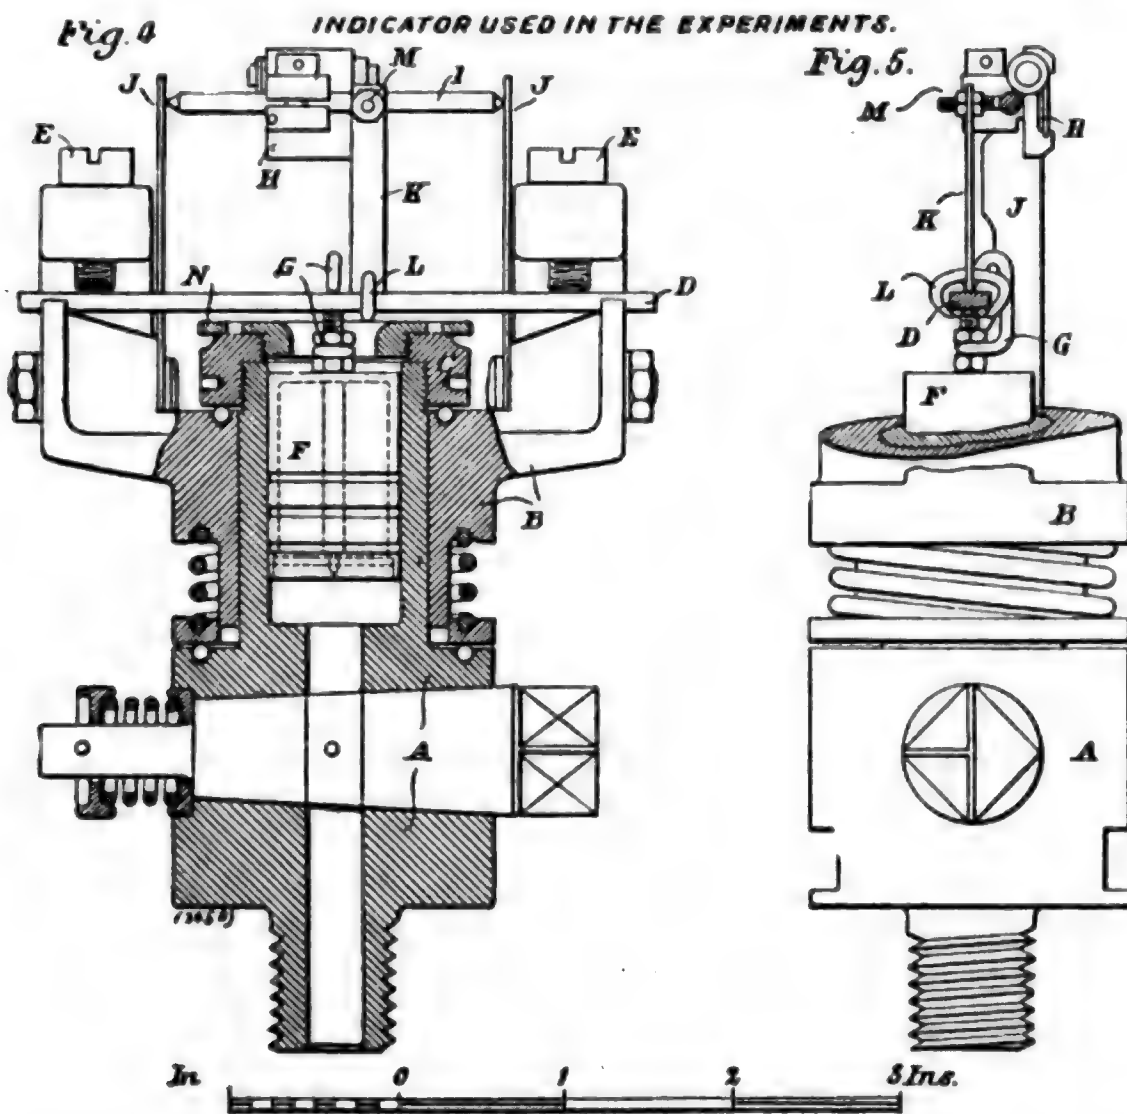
is a drawing of the instrument, partly in section. The block A is screwed into the ordinary indicator hole of the engine. The frame B fits over the block, sufficient clearance being left to provide for unequal expansion. The frame is held up by a spring into engagement with the lower face of the nut C (screwed to the top of A), a ball race being interposed so as to admit of easy rotation of the frame about the axis of A.
